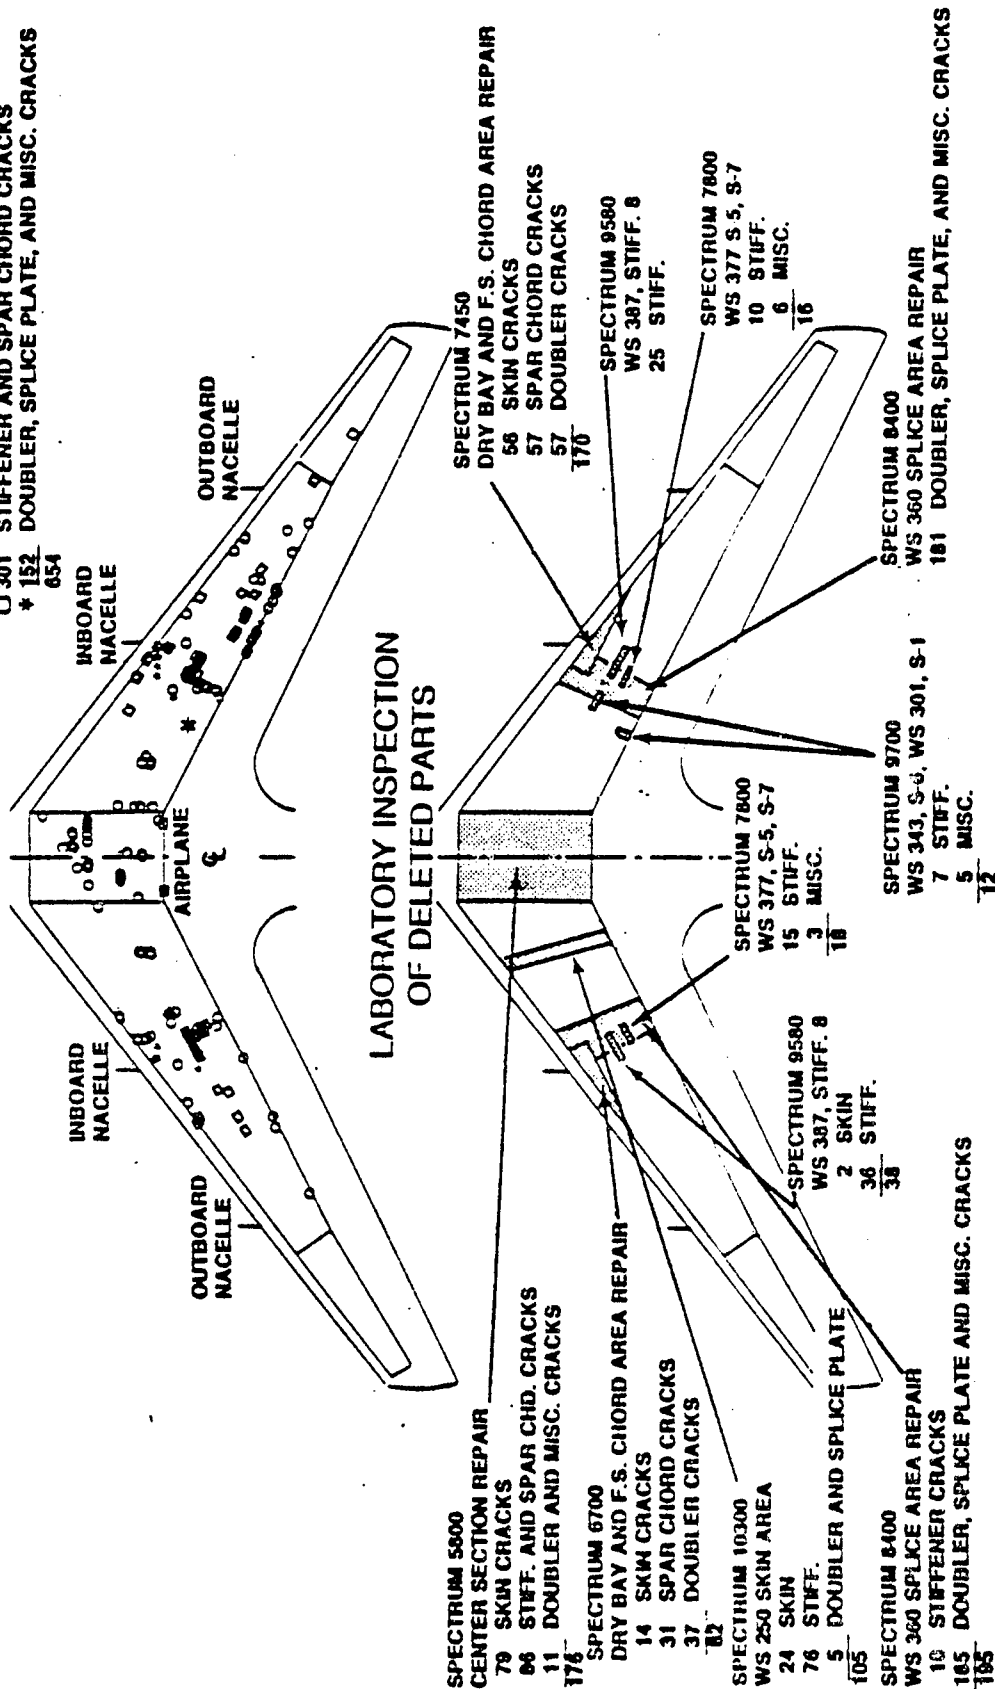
KC-135 Wing Lower Surface Fatigue Summary
